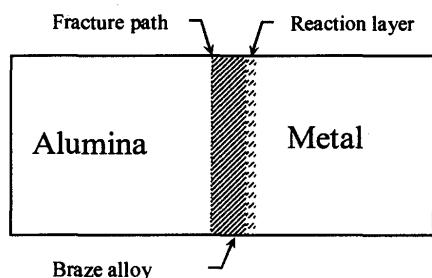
Illustration of brazed joint showing the fracture path.
